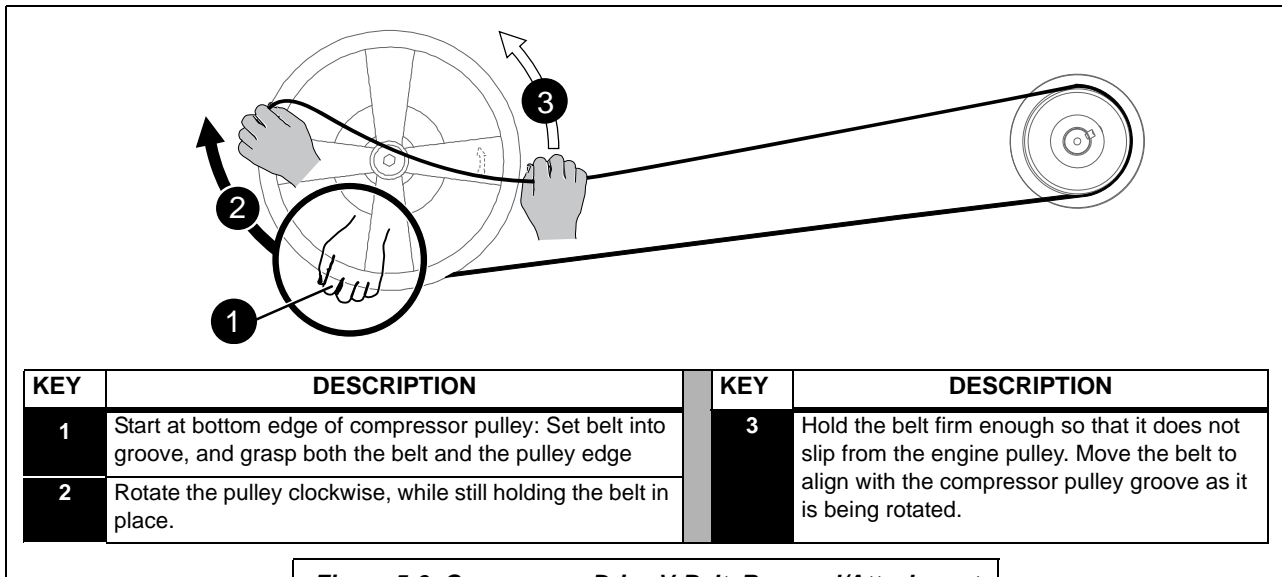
Compressor Drive V-Belt Removal/Attachment
